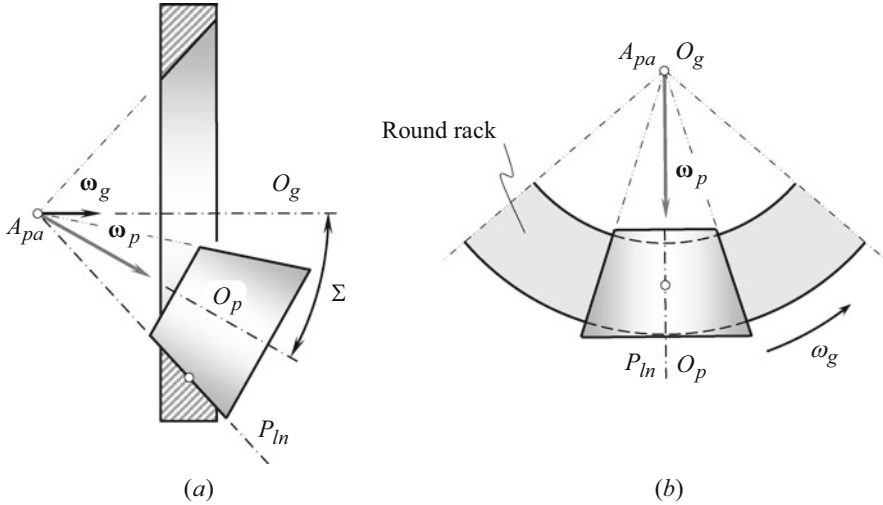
Desirable gear generic surfaces for intersected-axes gearing: (a) an internal gear pair and (b) a rack-type gear pair
